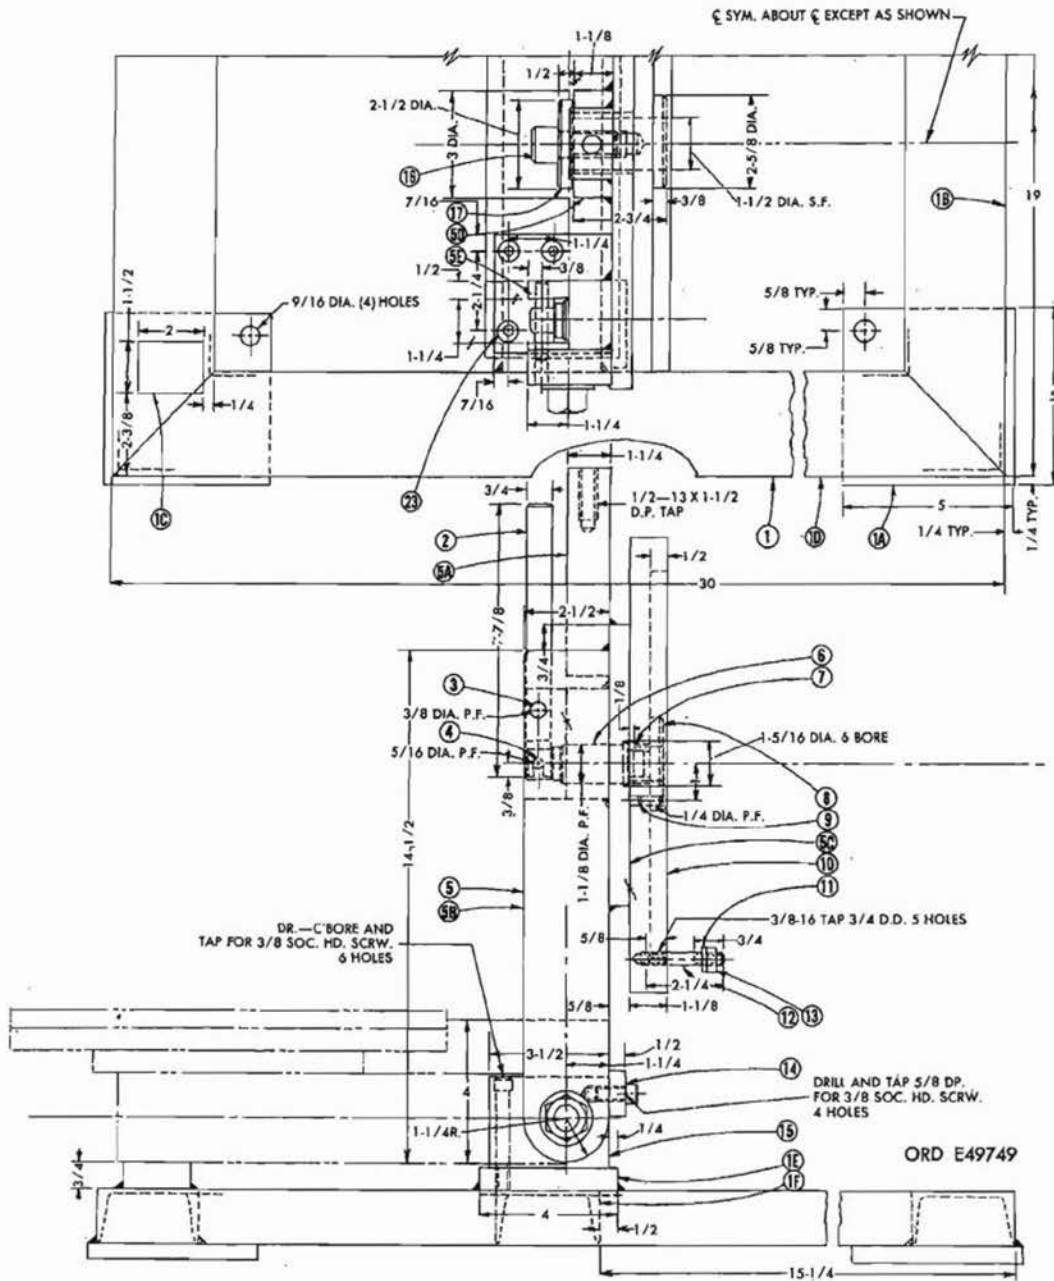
Improved stand for rebuilding engine or transmission and housing fixture - 65909-914241-T17 (sheet 2 of 2).
